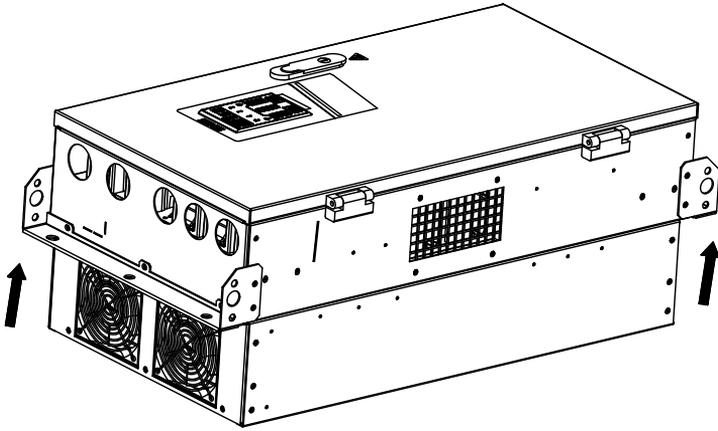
Assemble the Top and Bottom Mounting Holes
